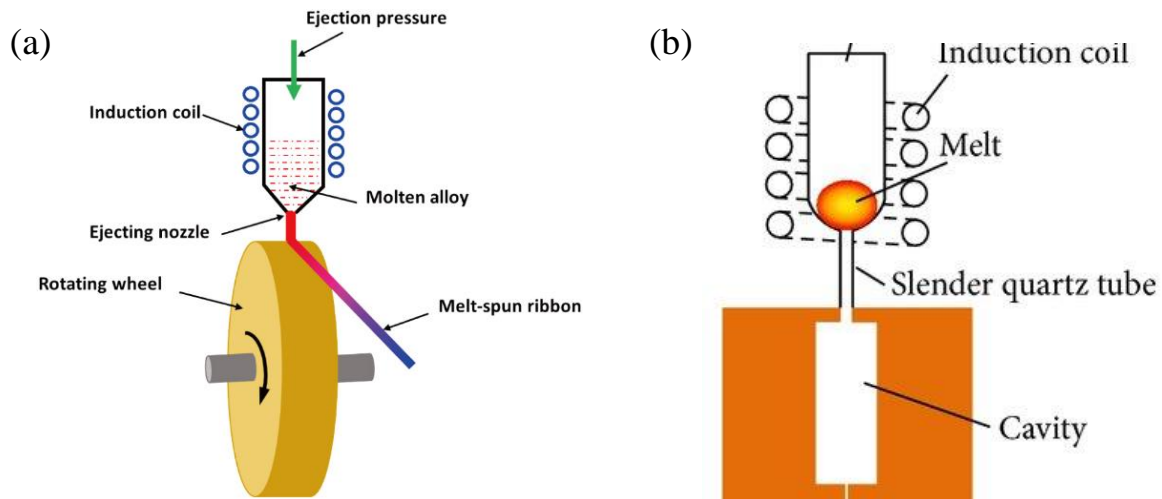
(a) Melt spinning [26] and (b) Copper mold casting [27].
